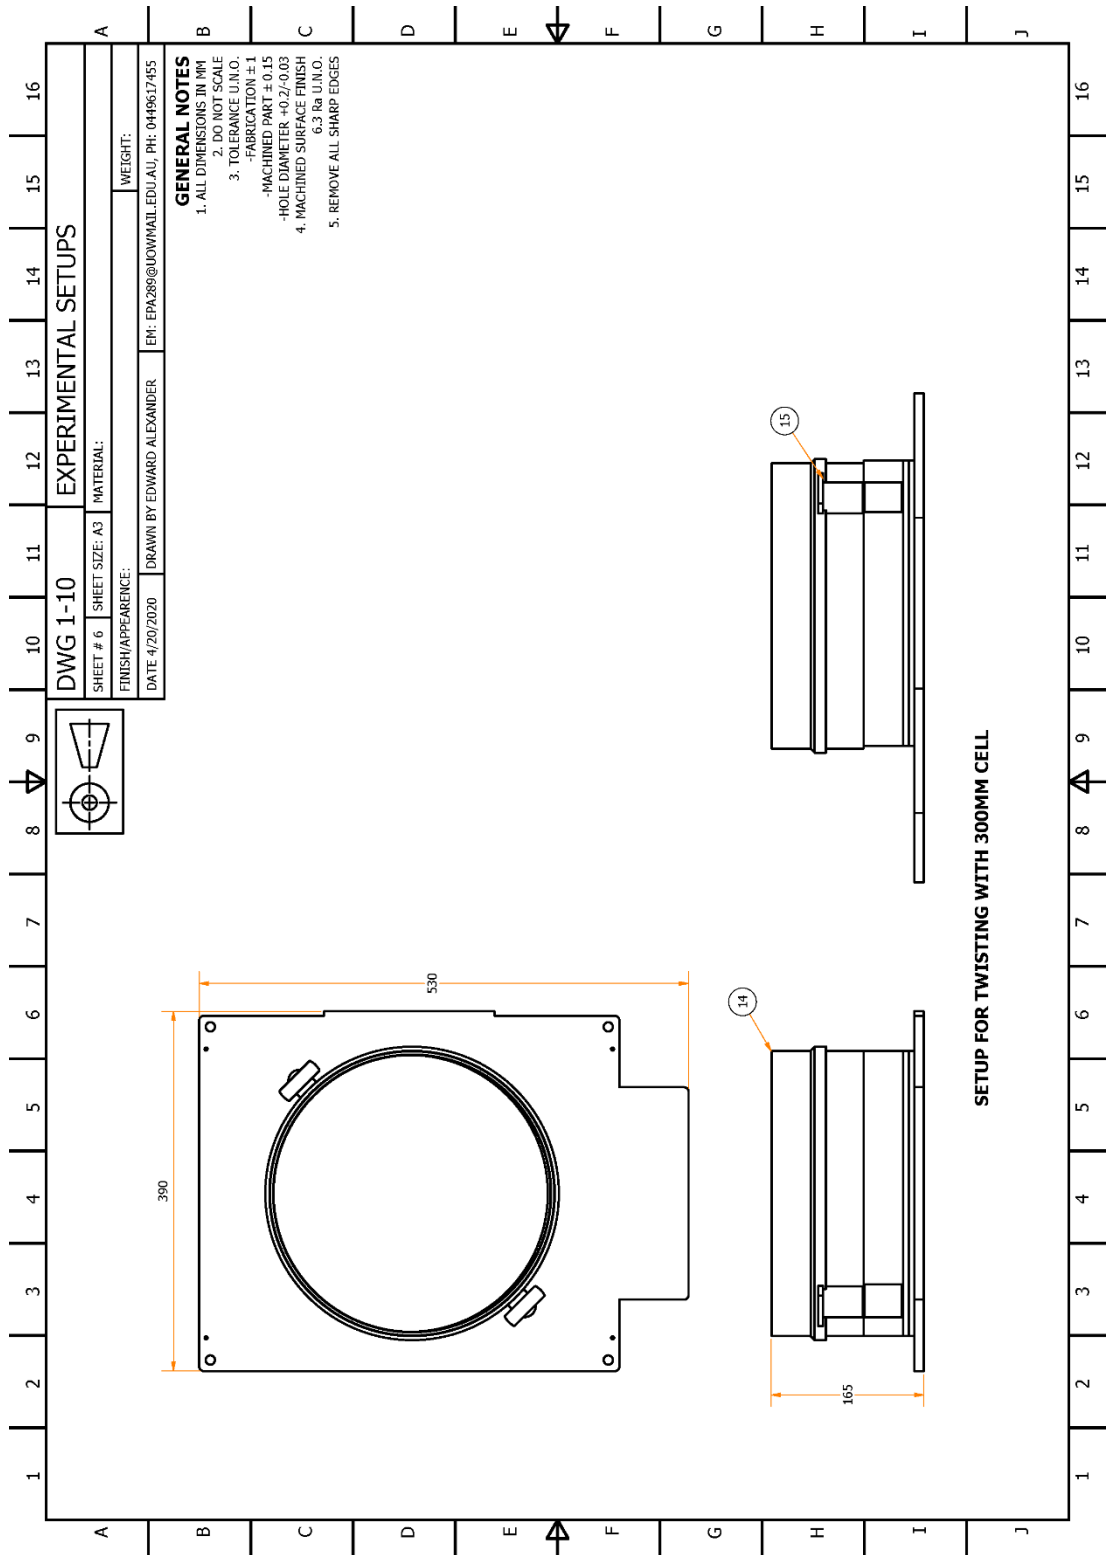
Drawing of set-up for twisting with 300 mm ID cell
